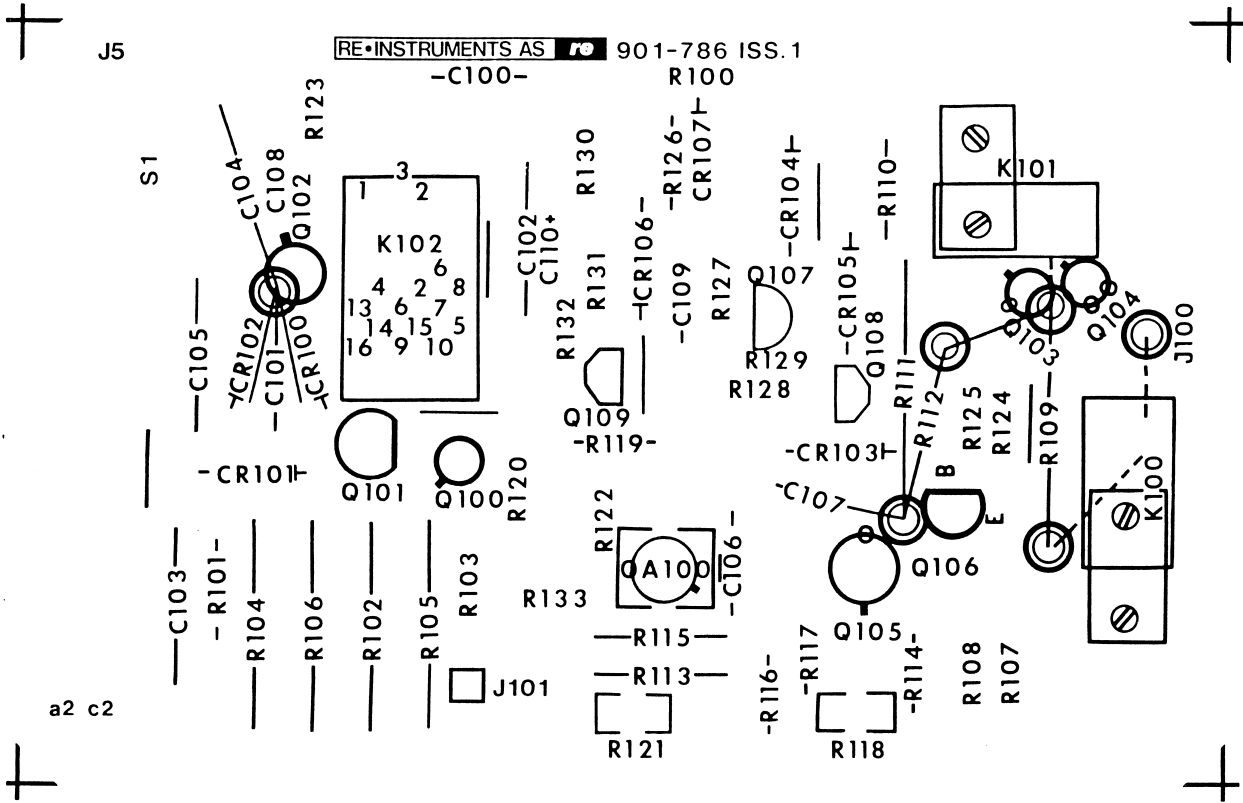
J5 Input Amp. Printed-Circuit Board, Code 901-786
